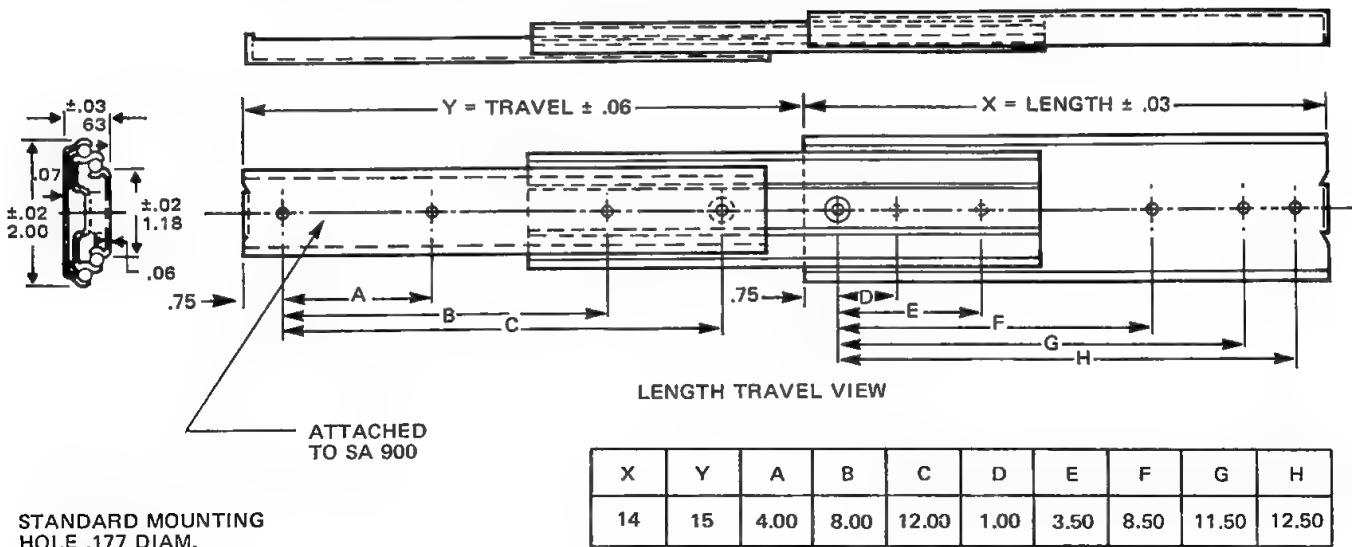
SLIDE MOUNTING DIMENSIONS
